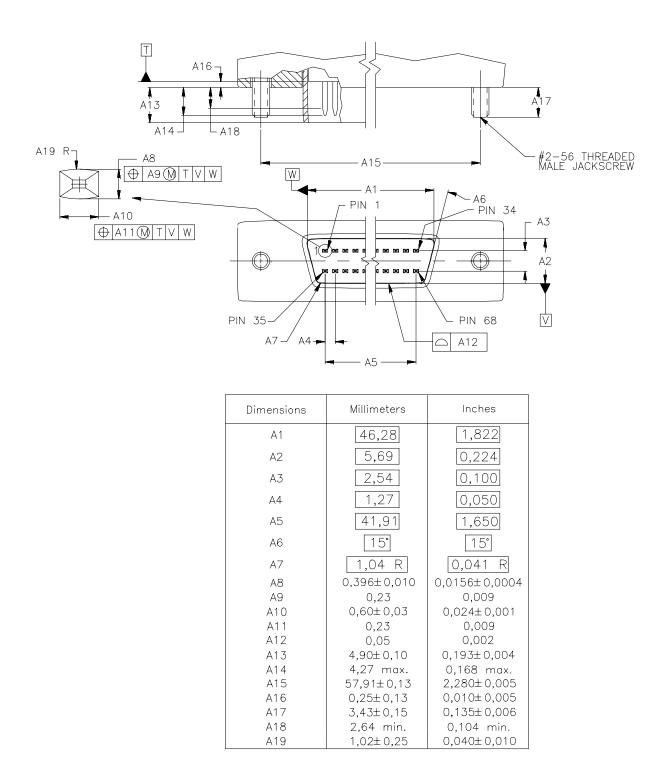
68-contact alternative 3 shielded mating connector (P cable)
